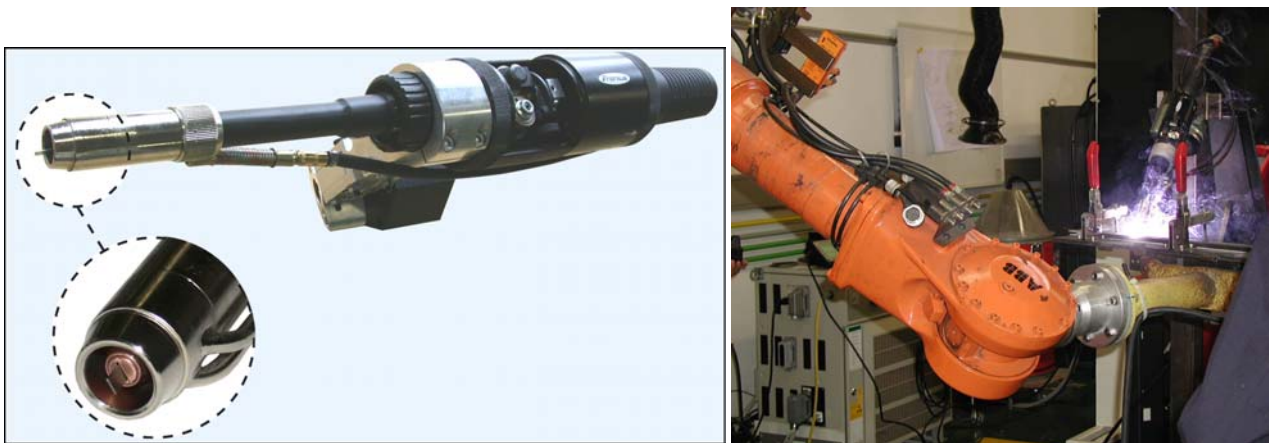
Push-Pull torch for strip wire welding and application with sample handling robot.
